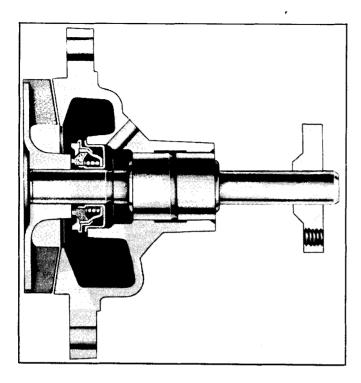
A-10 Cross Section of Water Pump (6 Cyl.)
